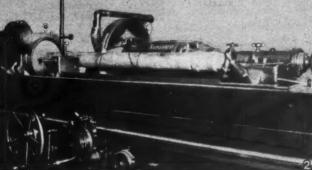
Grinding a locomotive crank pin in an 18 x 40 x 96-in. gap grinder. Fig. 2—Finishing a new piston rod to size.
